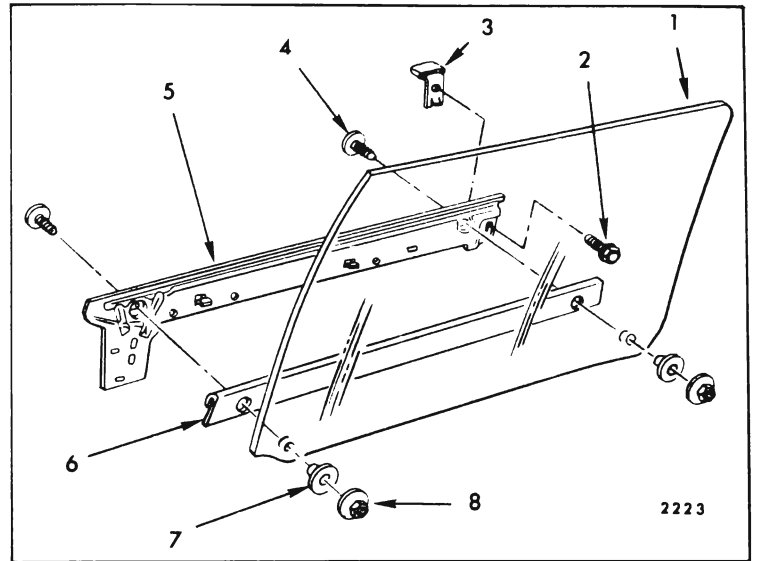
Rear Door Window Assembly - 68069-68169 Style
